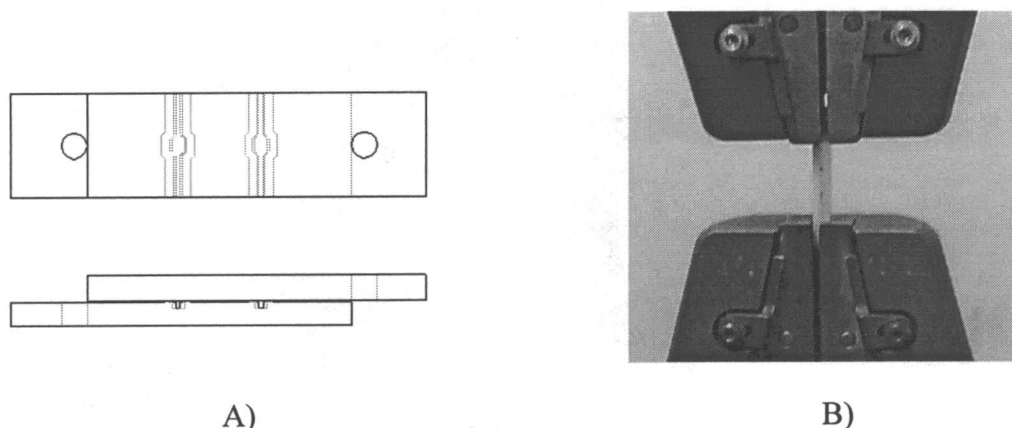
A bond strength testing of the chamber: (A) Specimen of an ultrasonically welded chamber used for bond strength testing and (B) Specimen installed in the tensile tester by gripping at both ends.
